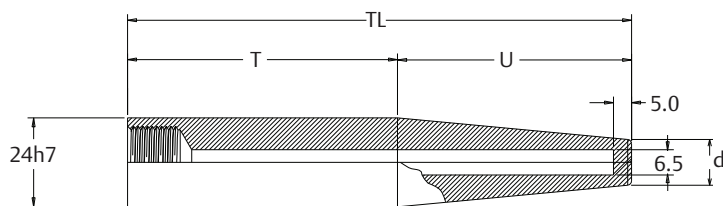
Weld-In Barstock Thermowell (Codes W10, W12, W14, W16)
